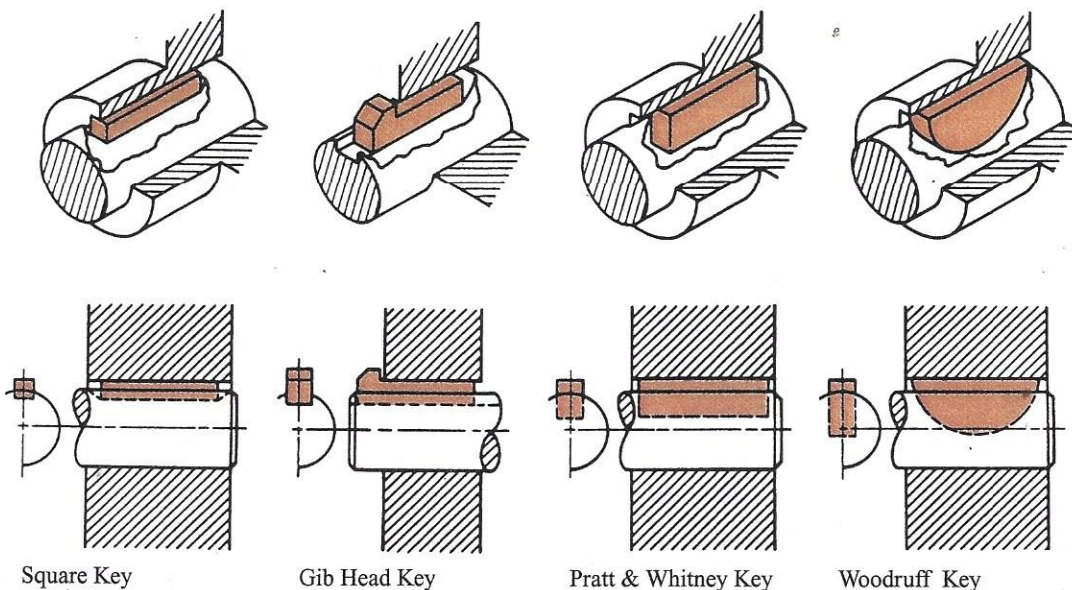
Keys used to connect shaft to pulley, gear, or wheel.
